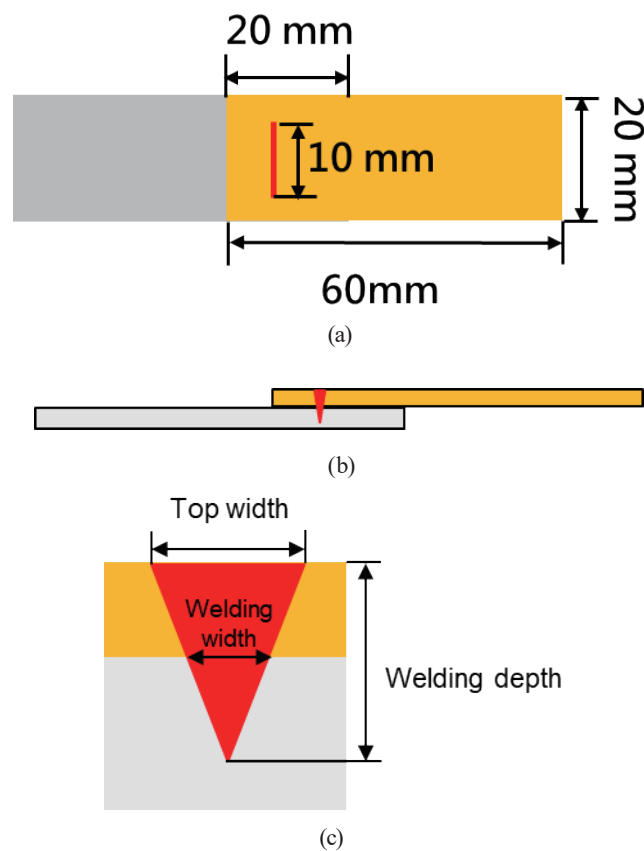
(Color online) Lap welding simulation and experiment setup: (a) top view, (b) side view, and (c) detailed weld bead structure to be observed.
